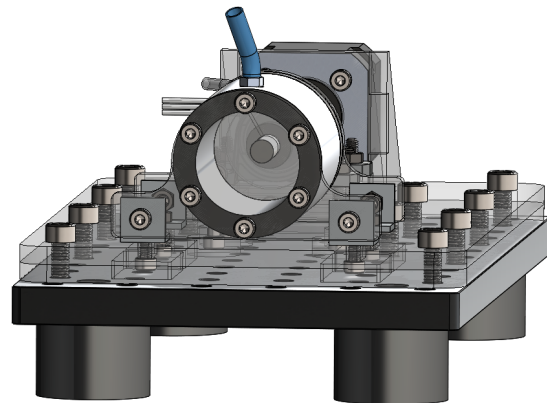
The transparent acrylic cover plate of the pressure chamber enables visual inspection inside the pressure chamber.
